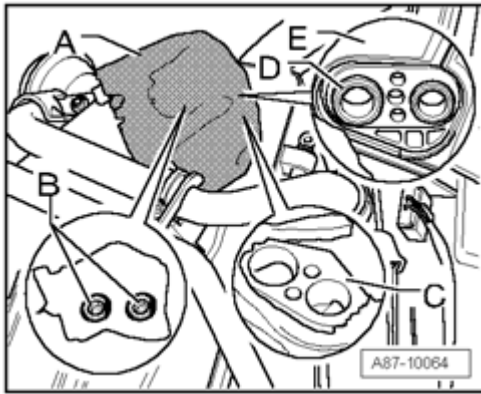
Identifying Heat Insulation, Bolts, Evaporator, And Connecting Flange
